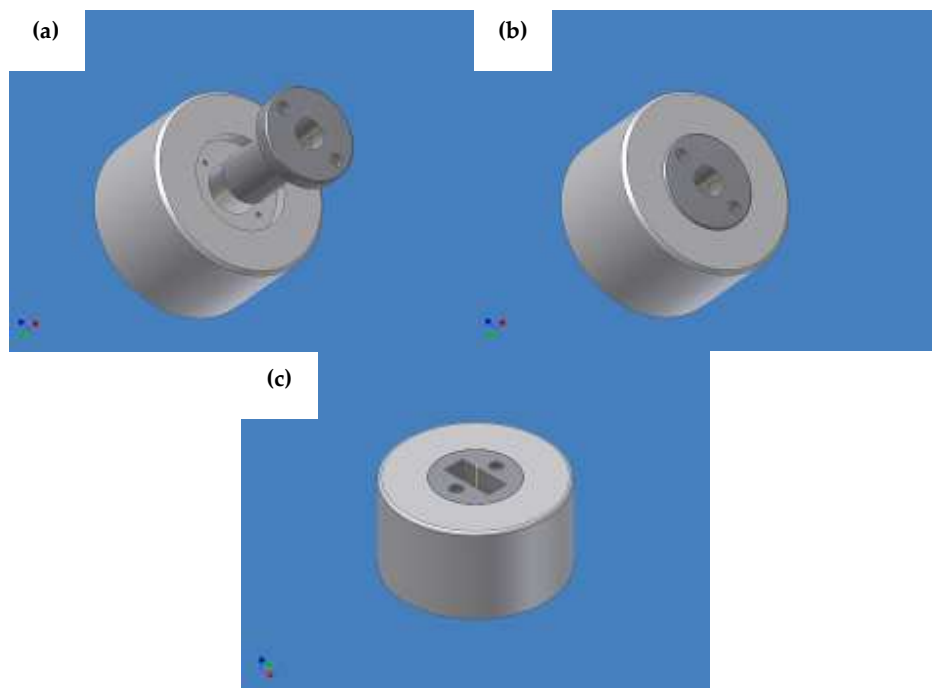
3-D models of (a) and (b) cylindrical die and (c) rectangular die, showing a two part design structure.
